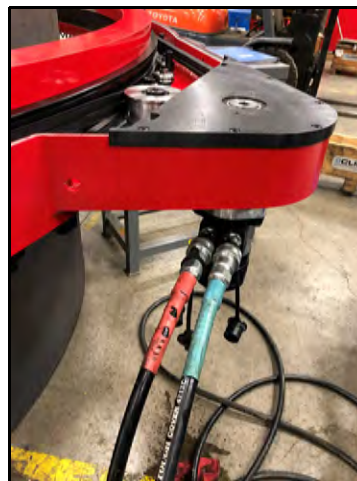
INSTALLED HYDRAULIC MOTOR DRIVE (BOTTOM SIDE)
